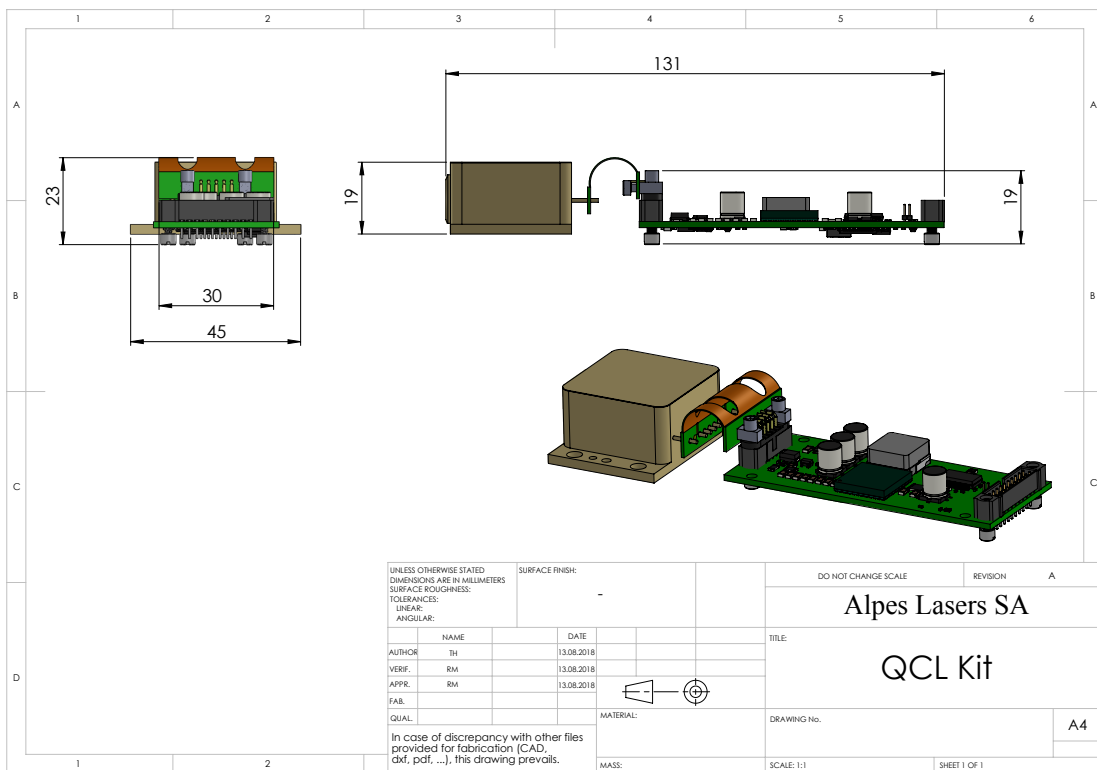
HHL-packaged QCL attached to the S-2m driver with a C-S2m-HHL cable
